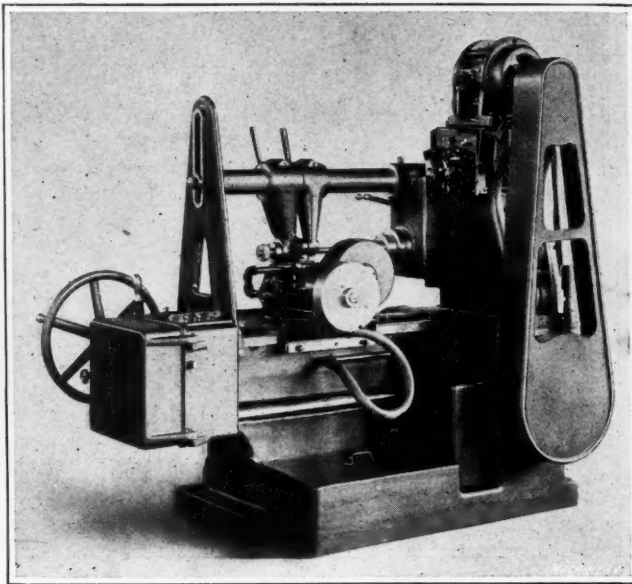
Opposite Side of the Cincinnati Gear-hobbing Machine shown in Fig. 1
